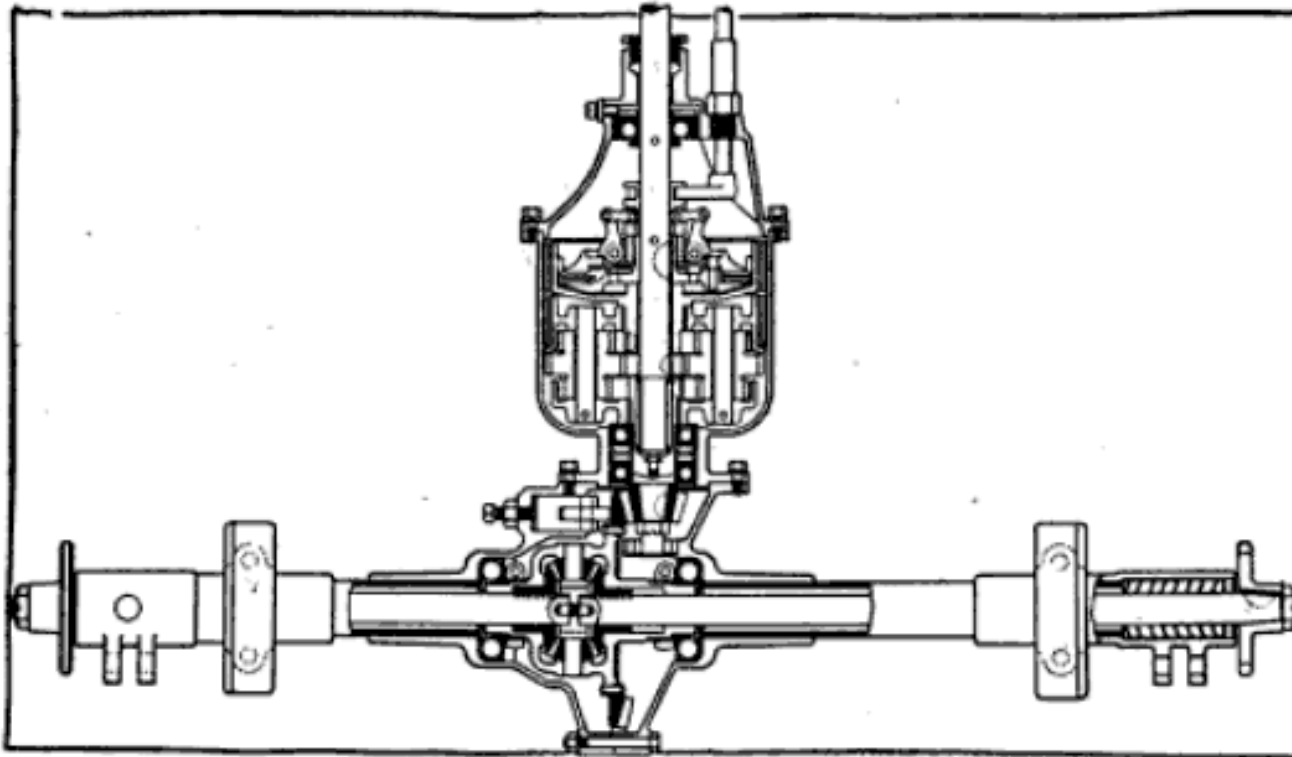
MUNCIE COMBINED PLANETARY GEARSET AND JACKSHAFT
